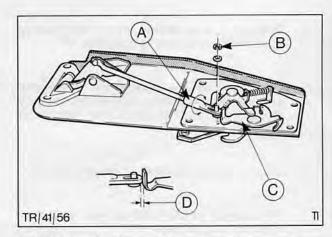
Private lock lever and lock release rod adjustment. Private lock lever in 'locked' position
